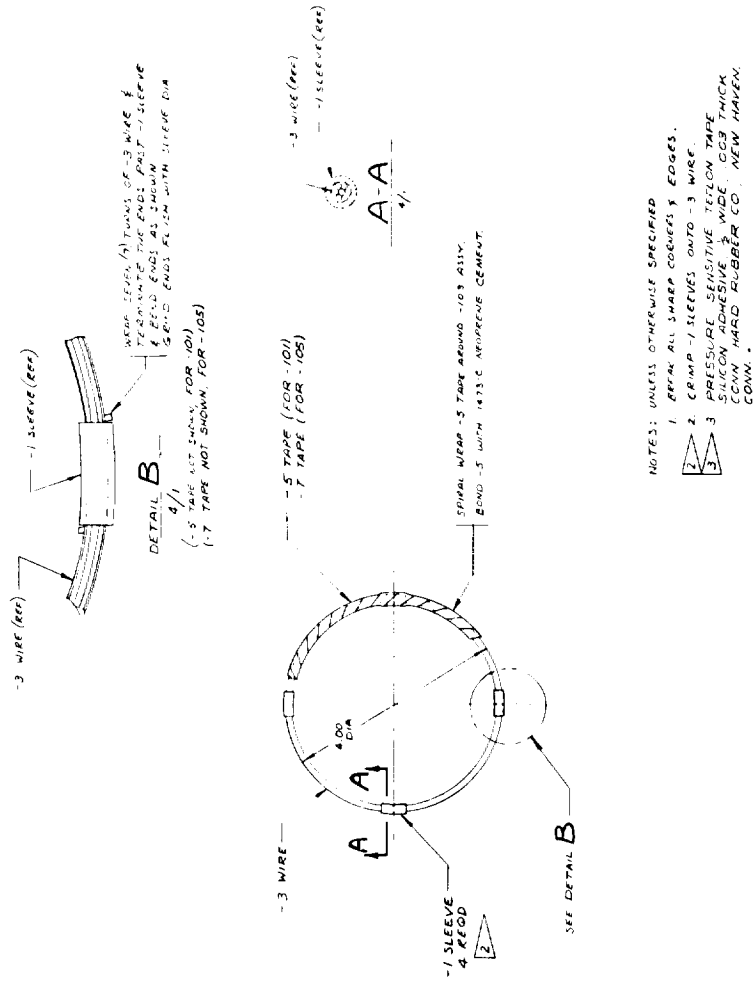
BALLUTE Inlet Ring (Drawing 530A005-110)
